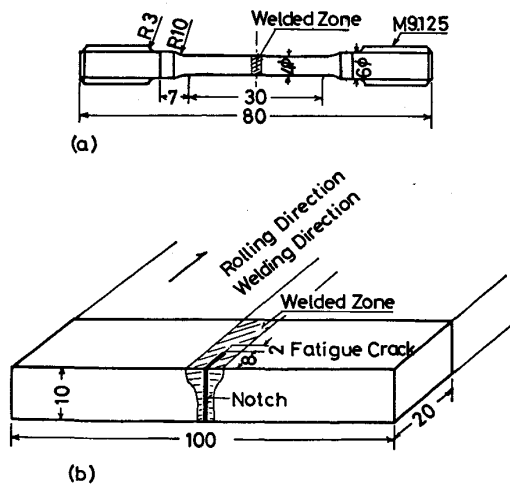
Dimension of (a) tensile and (b) fracture toughness specimens.
